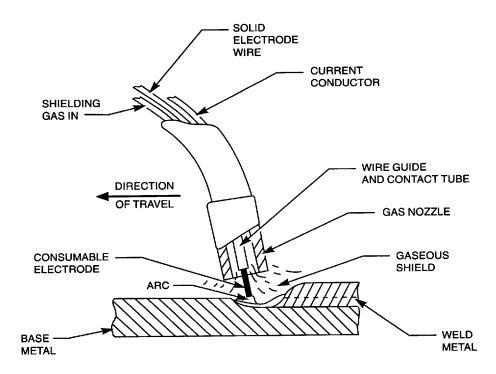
Gas Metal Arc Welding (GMAW)
